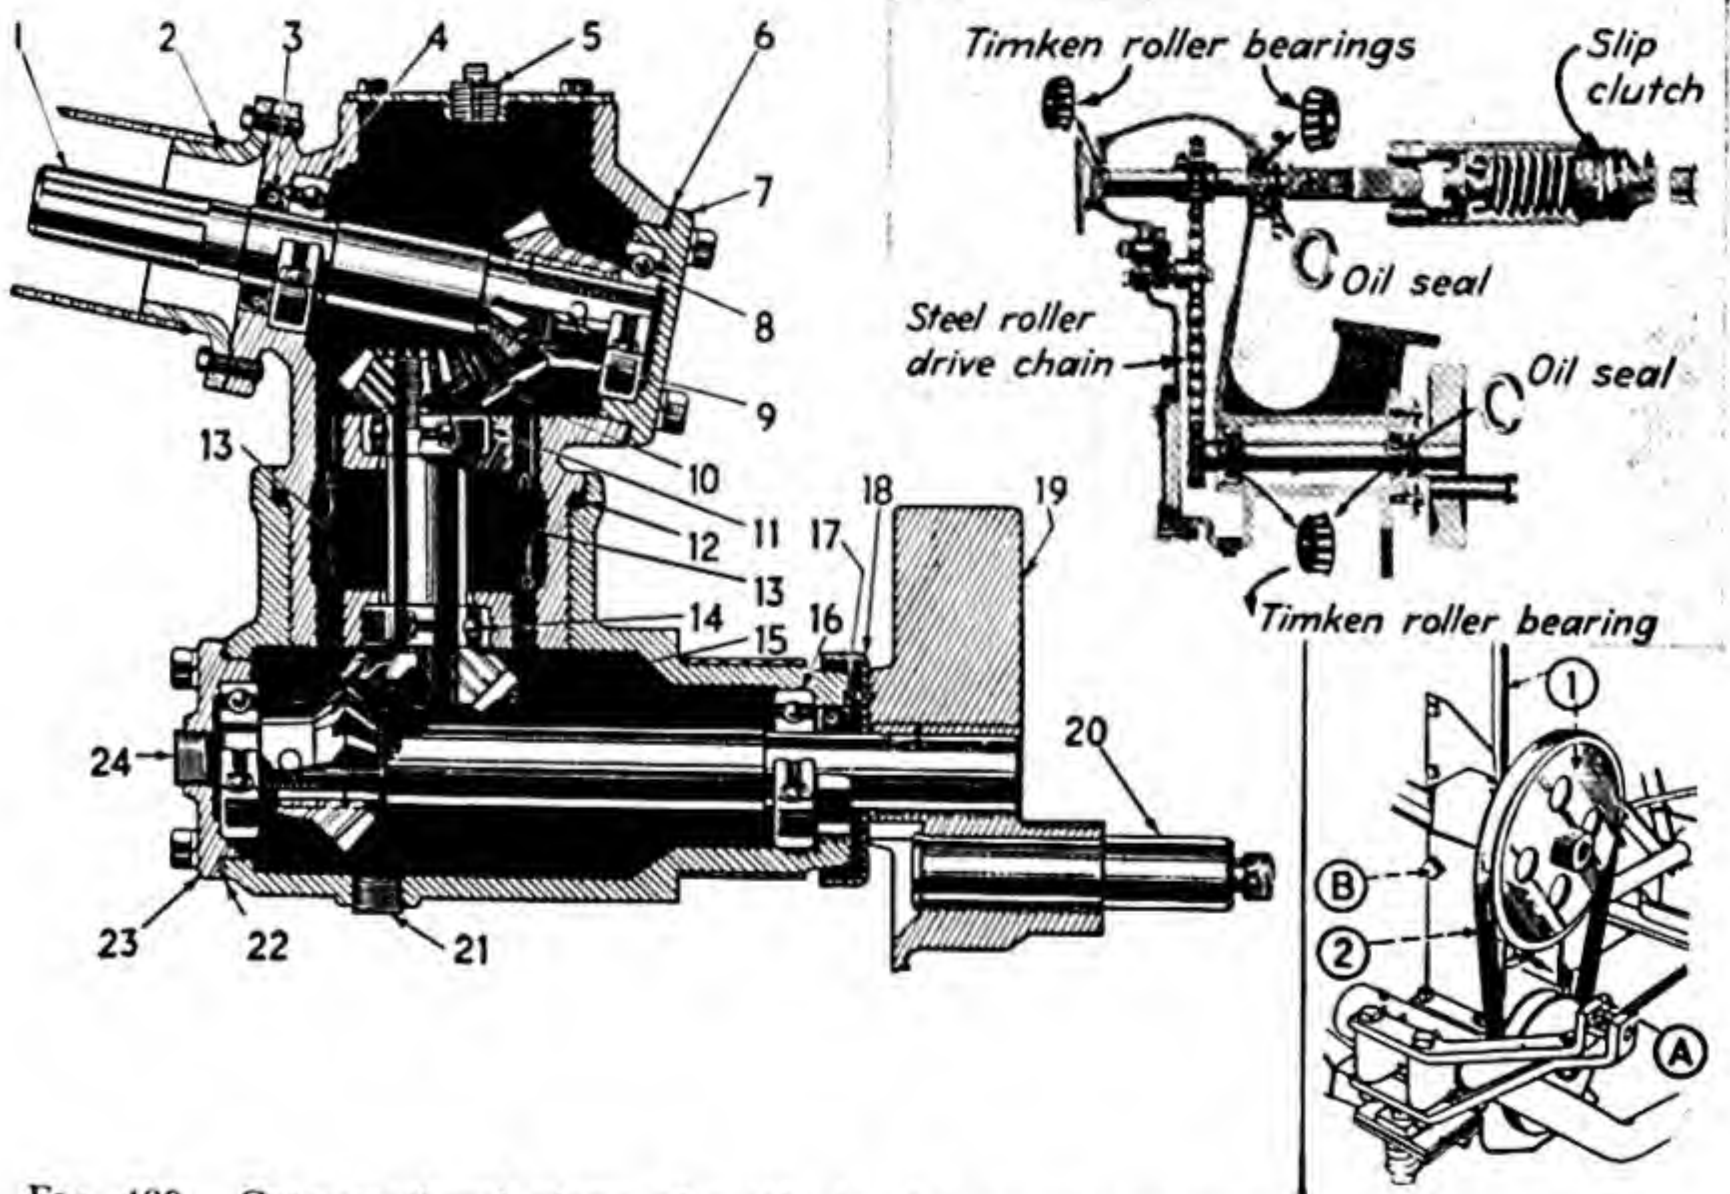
Cross-sectional views of methods of transmitting power on tractor mowers. *Left*, enclosed gears; *right top*, chain drive; *right bottom*, V-belt drive.
